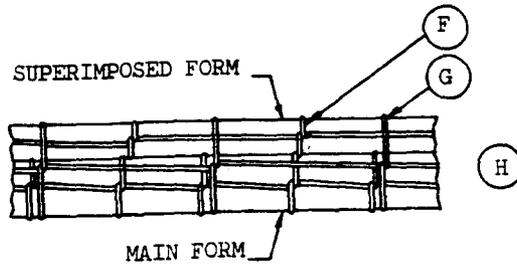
SEWING AND BANDING (NYLON TIE) REQUIREMENTS FOR SEWED FORMS AND SUPERIMPOSED WIRING (PARS. 2.34, 3.25, 3.26, 3.31, 3.32) (Contd)
